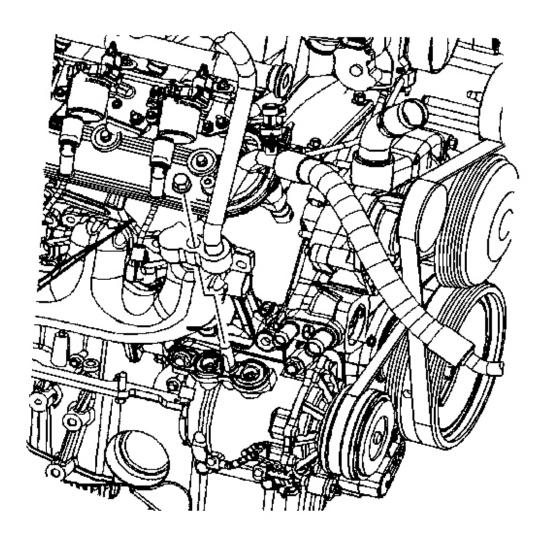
Identifying Compressor Hose Assembly & Nut Courtesy of GENERAL MOTORS CORP.
